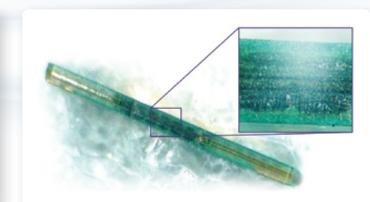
A clean cut surface of a depaneled PCB moduled.
